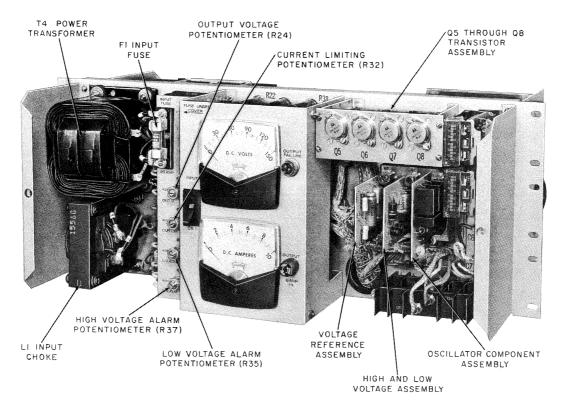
KS-19304 L1 (Front View—Cover Removed)
